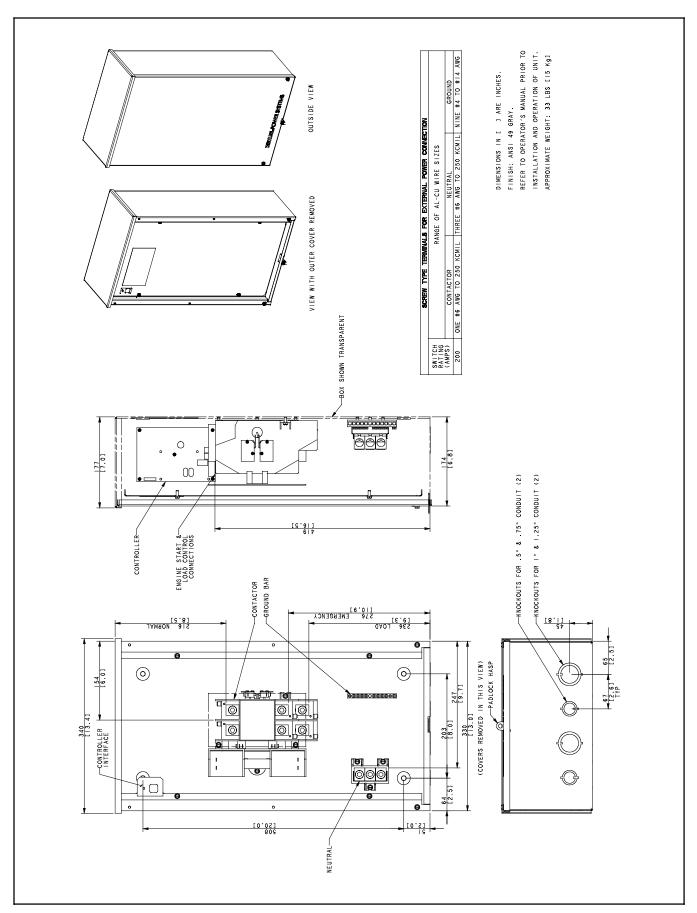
Dimension Drawing, 200 Amp NEMA Type 3R Enclosure without Load Center, ADV-7405
